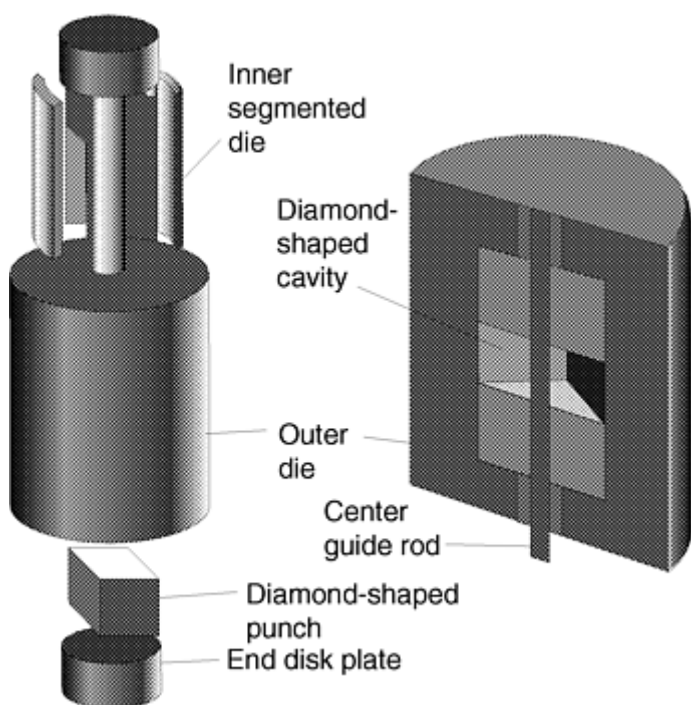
Die-and-punch configurations for net-shape sintering of cutting tool insert. Courtesy of K. Yamazaki (U.C. Davis)
